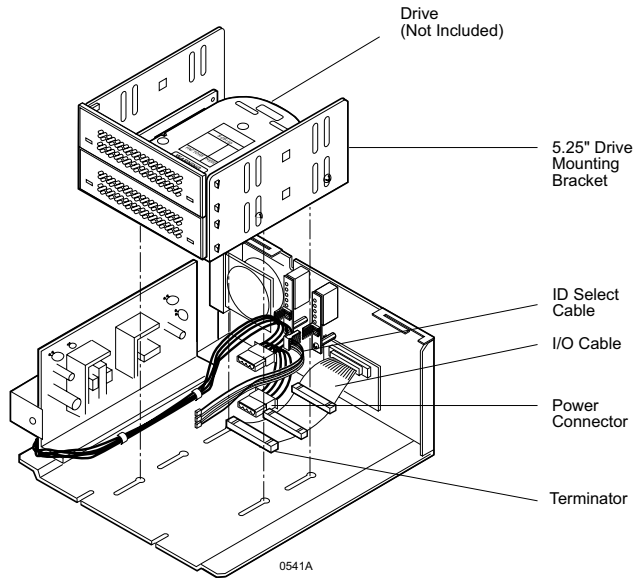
Installing the DS100 2-Bay Drive Mounting Bracket
